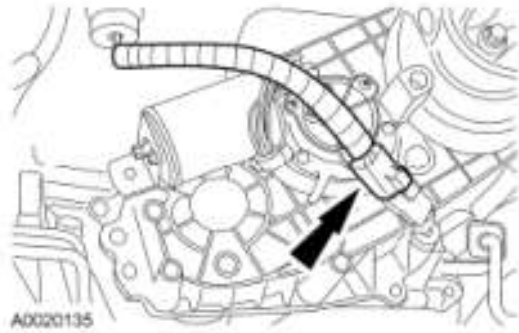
Locating Transfer Case Shift Motor Electrical Connector
